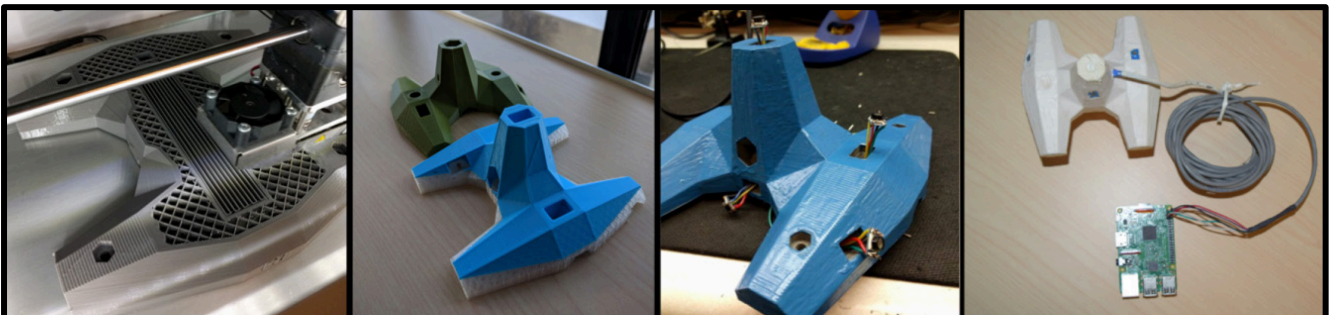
Printing of unit (1), Printed unit (2), Circuit Assembly (3), Final instrumented unit (4).
